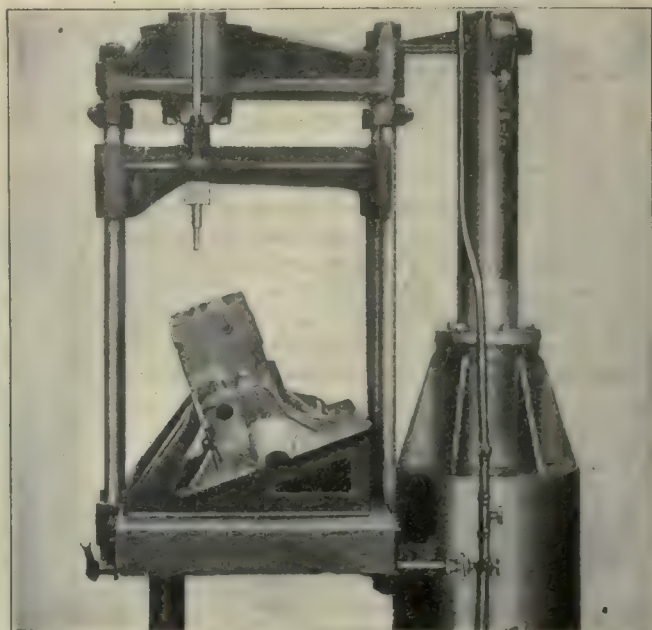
FIXTURE FOR BROACHING HOLES AT AN ANGLE
